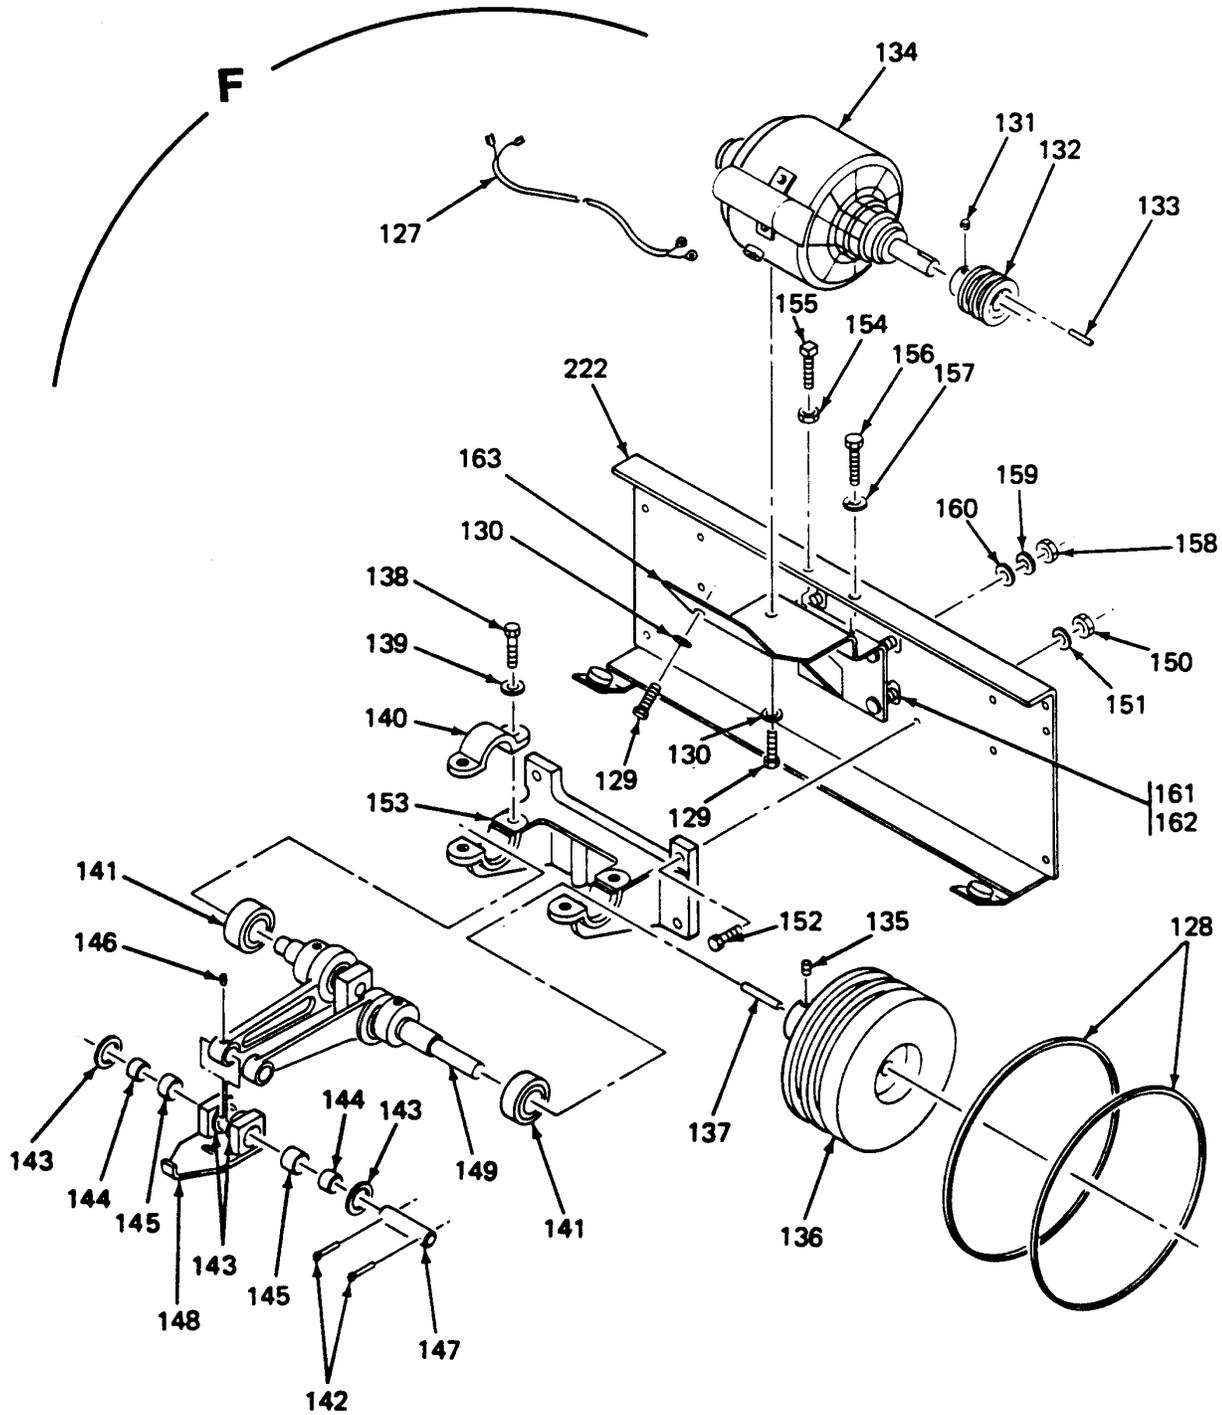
Bread Slicer, Model MB (Sheet 4 of 9)
